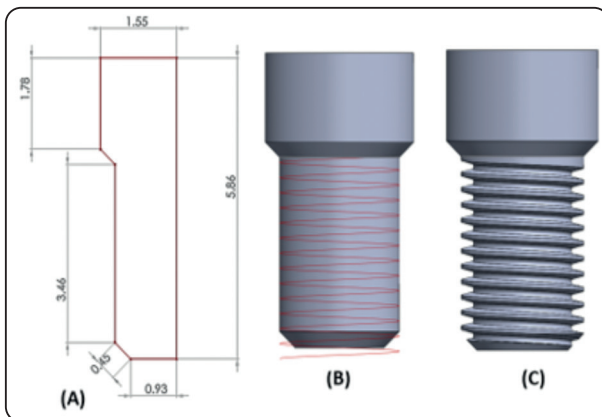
(A) sketch for half the screw with dimensions, (B) helix of the screw, (C) screw threads
